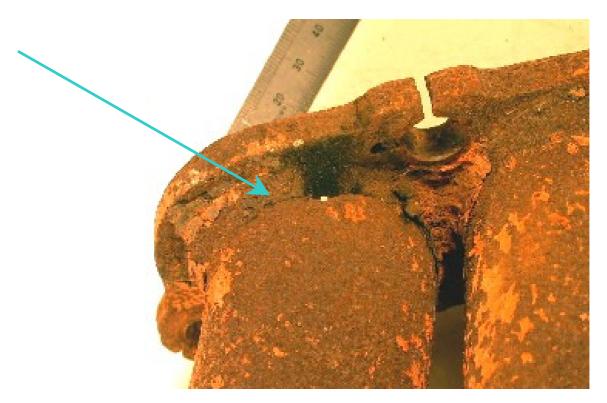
External view of duplex connector tube flange showing carbon deposits and cracking (arrow). Note extensive corrosion.
